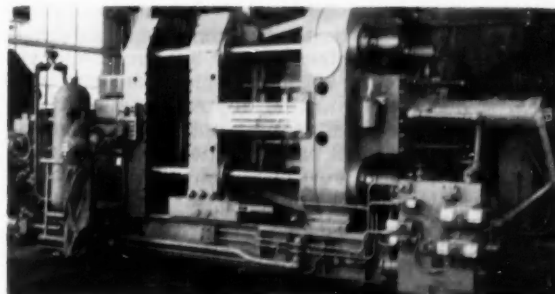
A die casting machine used to produce Chrysler's die cast aluminum torque converter housings.
